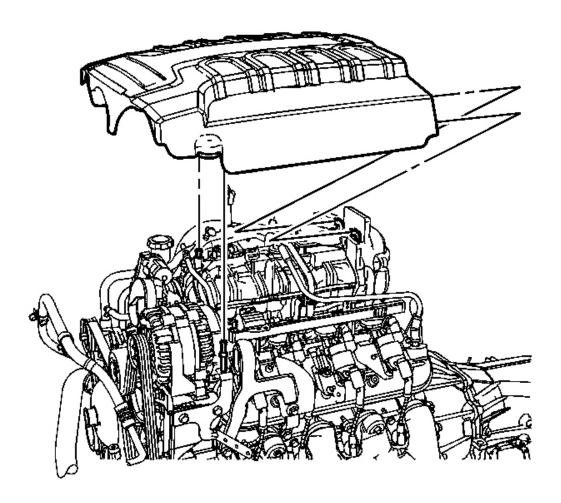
Upper Intake Manifold Sight Shield Replacement Courtesy of GENERAL MOTORS CORP.
